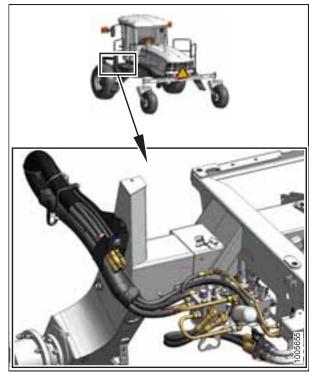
Auger Drive Basic Kit and Completion Kit Installed
